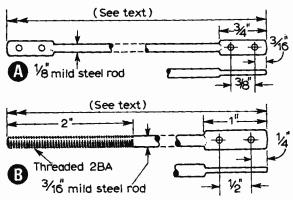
Coupling rods. (A), to lever rollers. (B), to pedals.
